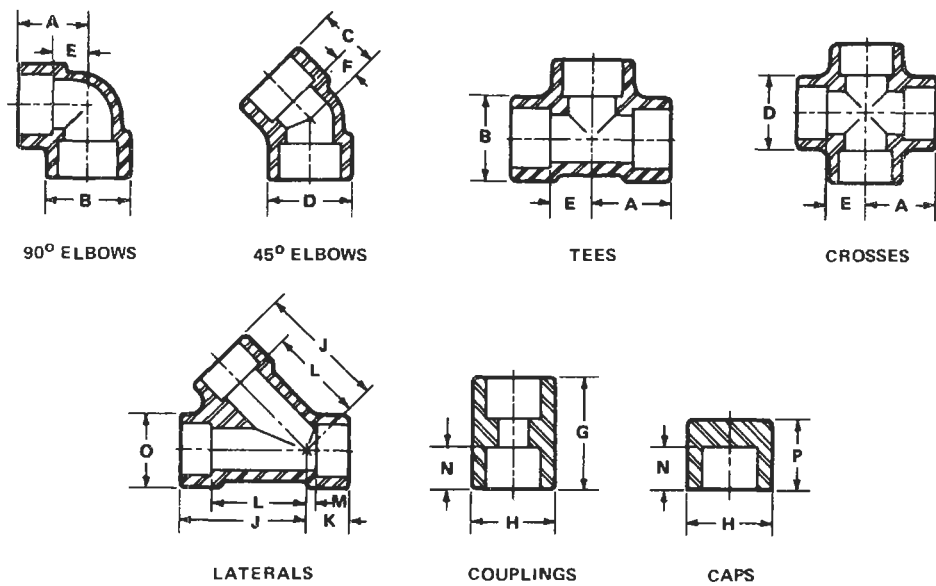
B. Forged steel socket weld fittings, WOG (water, oil or gas service). Note: the working pressures are always well above actual plant operating levels and are heavy to allow for welding. Pressure classes 3000 psi and 6000 psi, sizes 1/2 in. through 4 in. nominal. Do not weld on malleable iron or cast iron fittings. (By permission, Ladish Co., Inc.)
